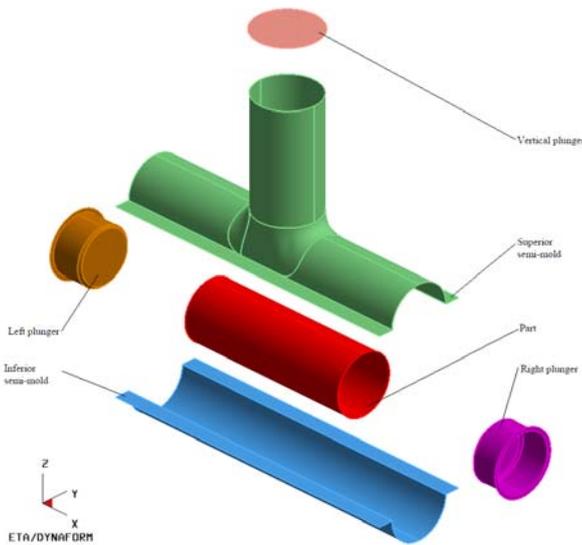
Importing geometric models of the part and of tools active surfaces into DYNAFORM
